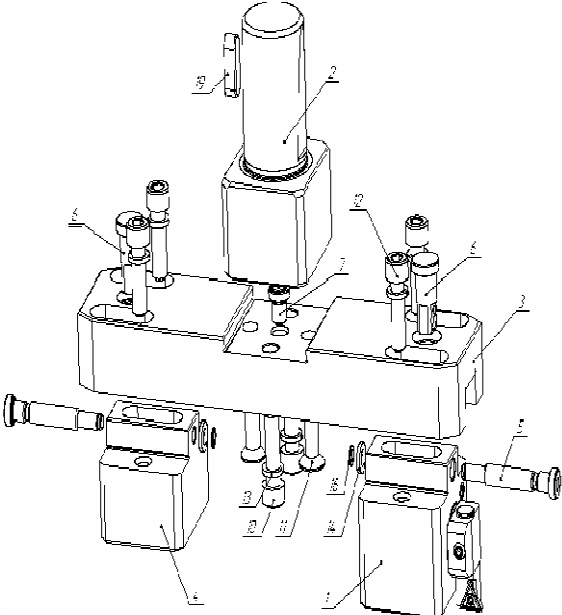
Flowsheet of boring head for boring range 180 – 360 mm
